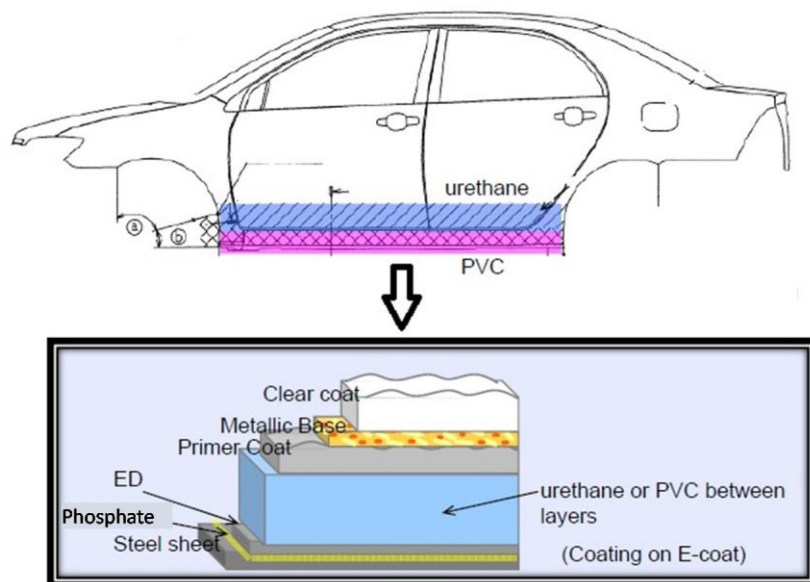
The anti-chipping material coating on lower doors and rocker panels.
